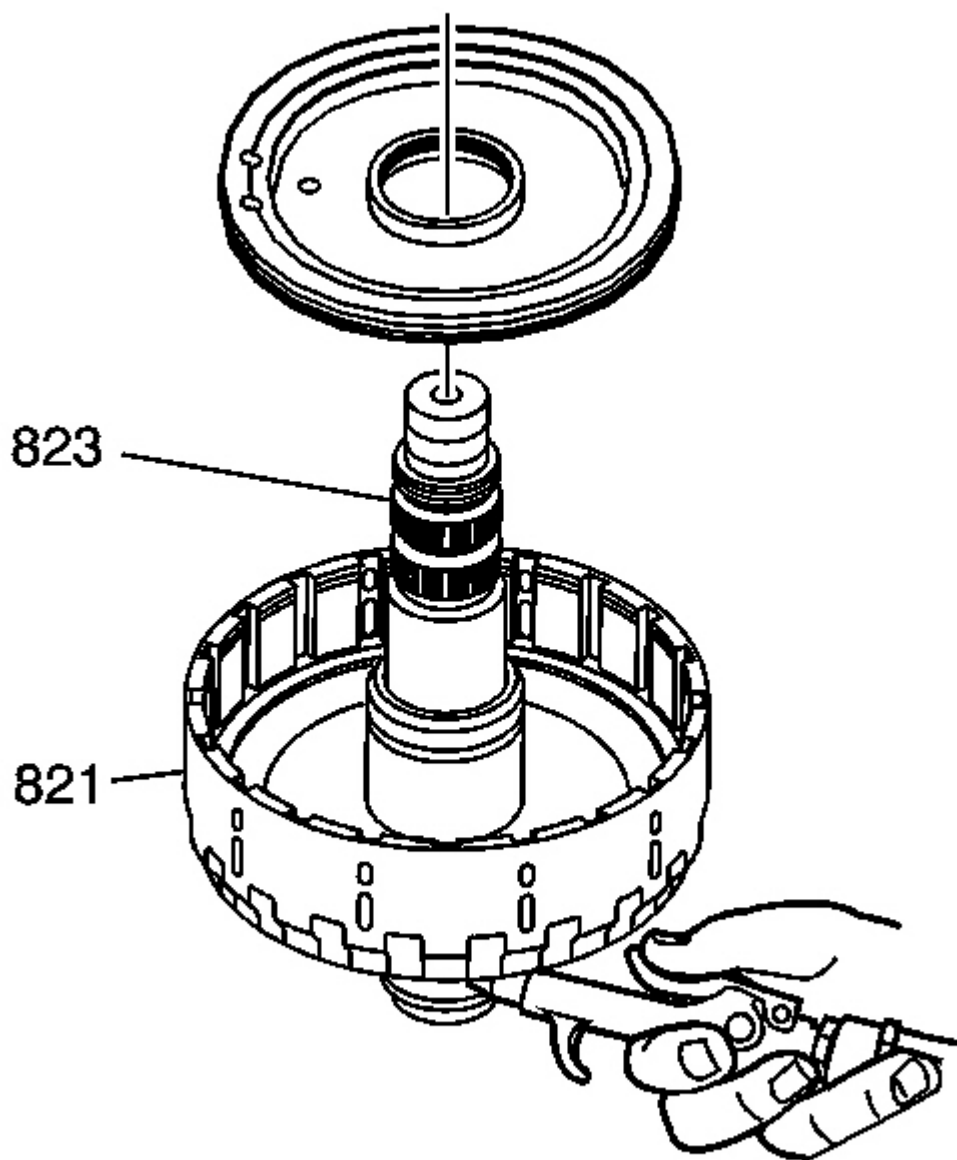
Applying Compressed Air To 3rd Clutch Piston Fluid Apply Port
